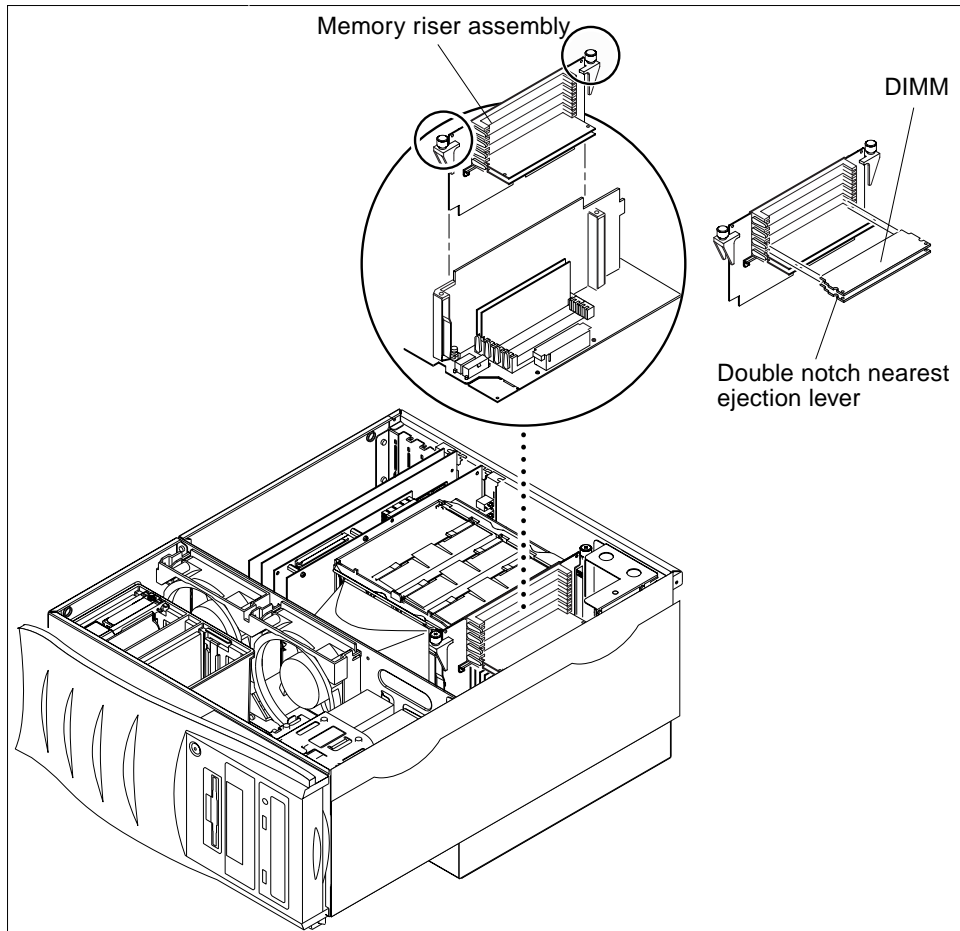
Removing and Replacing a DIMM (Sheet 1 of 2)
